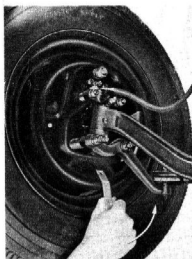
Adjusting Brakes— $\frac{1}{2}$ Ton
